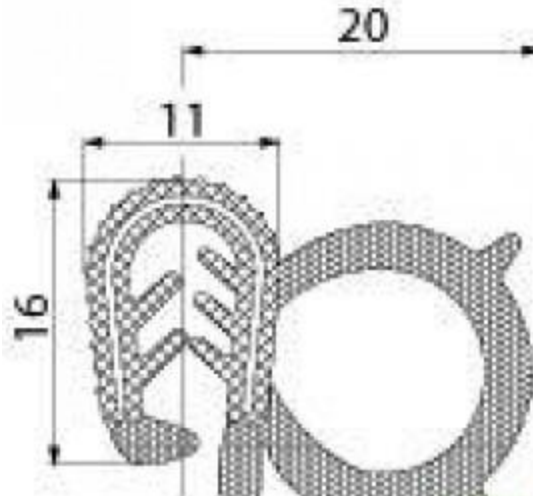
Cross-Section of Self-Gripping Seal /Gasket
